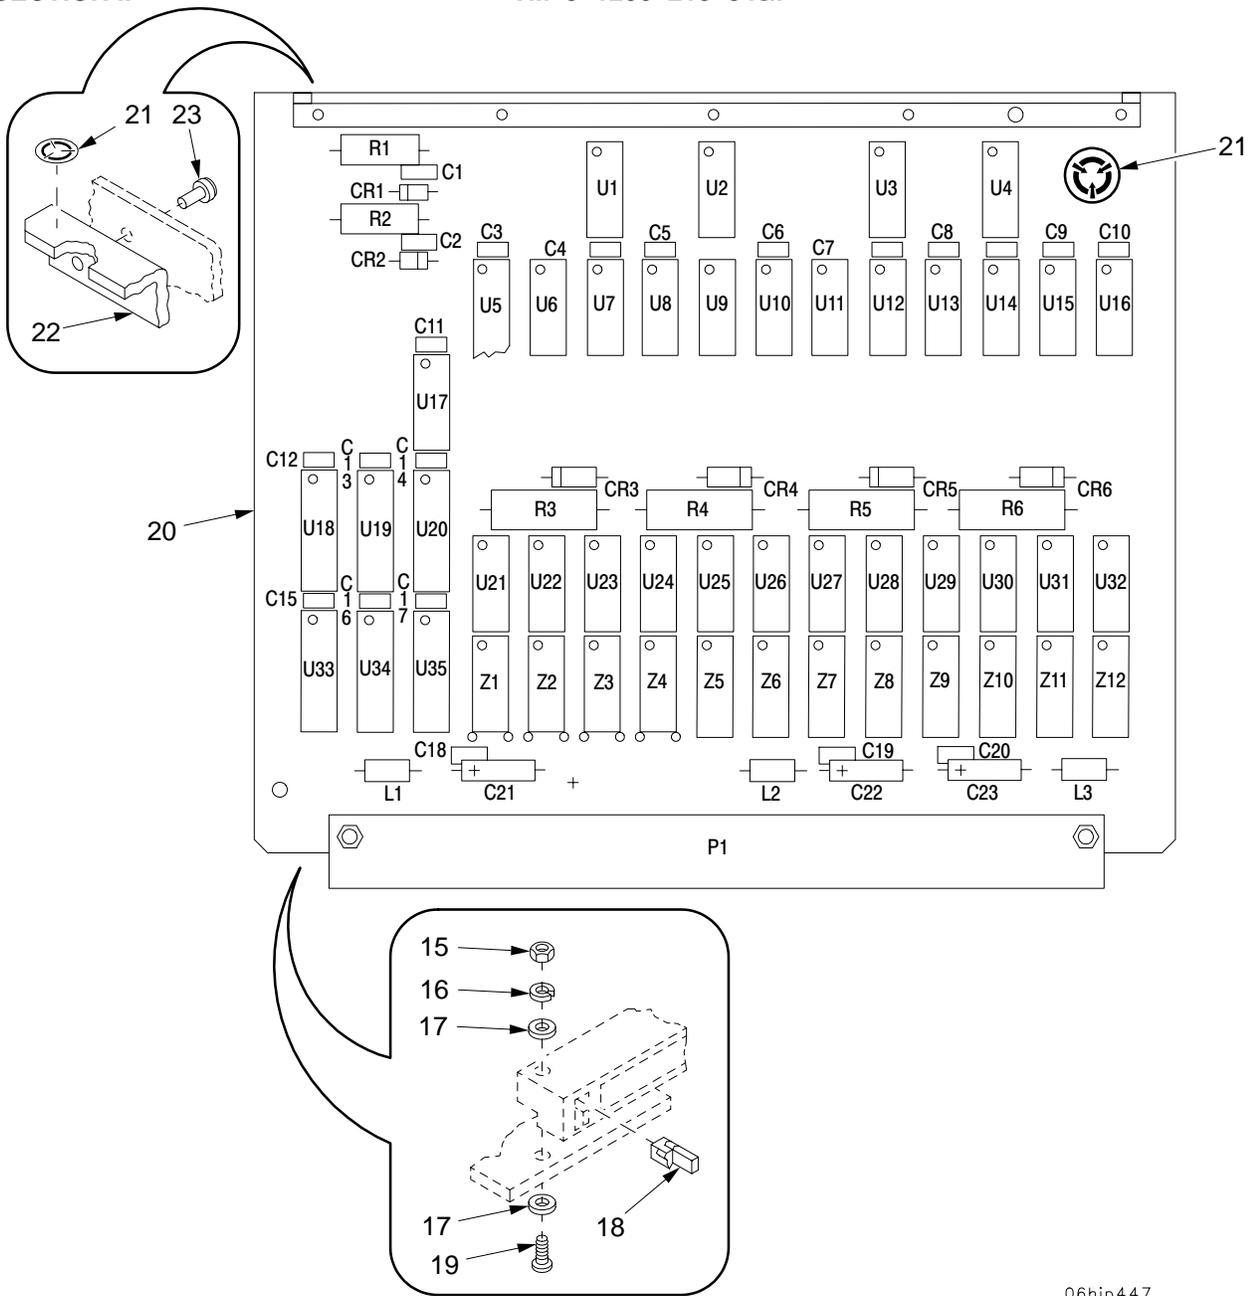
Circuit Card Assembly, Processor A4 (12554041) (Sheet 2 of 2)
